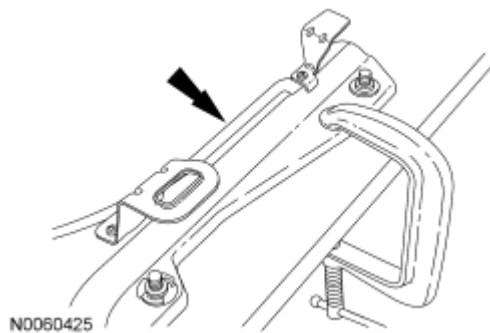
Clamping Side Plate To A Bench Or Table Using A Suitable Tool
